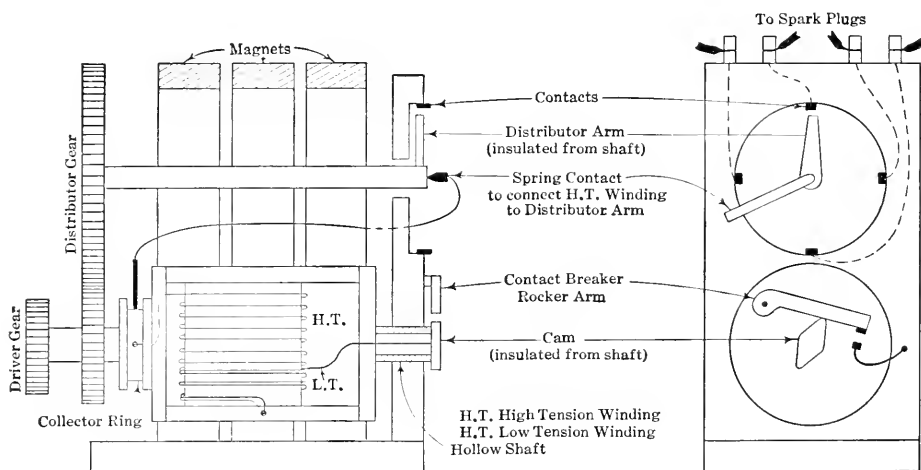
Showing how the double winding magneto is used for automobile ignition; the motion of the cam and rocker arm give one spark in the secondary when the primary circuit is opened and this spark is distributed in turn to the various cylinders of the engine. The distributor is generally mounted integral with the magneto, as shown here.
